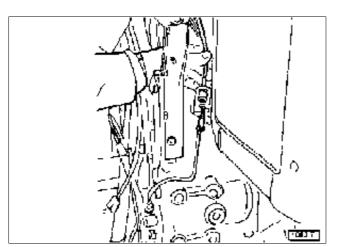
Disconnect the oil line of the gearshift clutch circuit.
